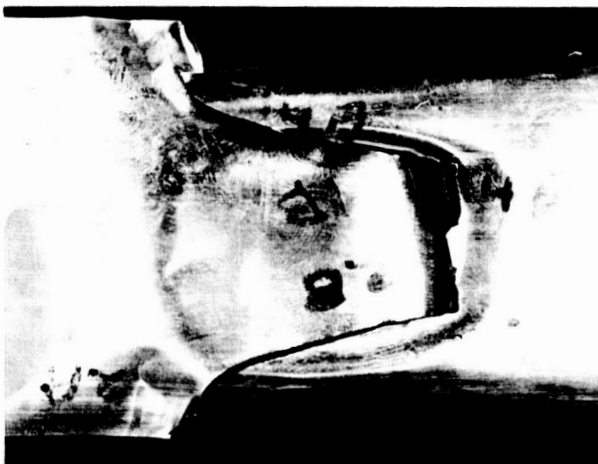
View of Fractured Area, Tube Flattened Out (Magnification 1.5X)
